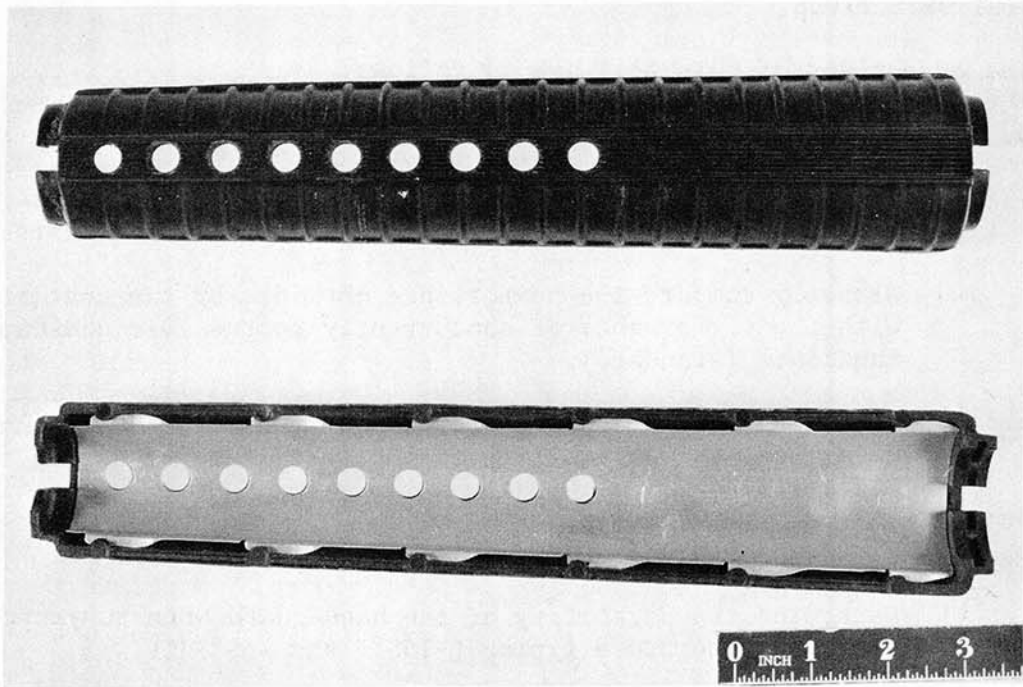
Modified Hand-Guard Showing Outside and Inside Views.
